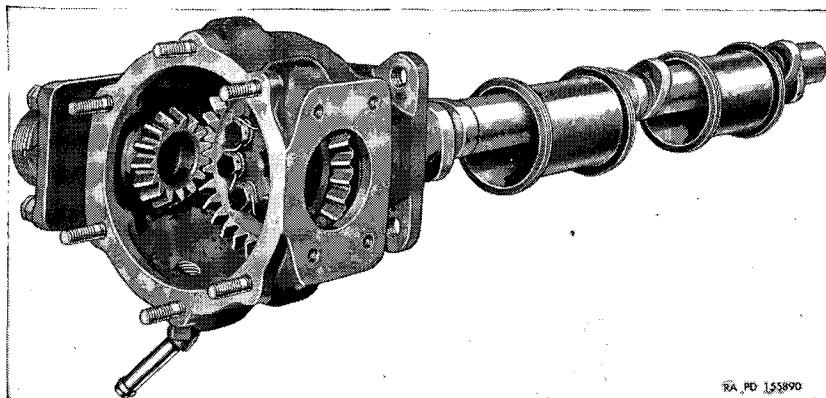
Camshaft and gear housing removed—from engine right (1-3-5) side.
